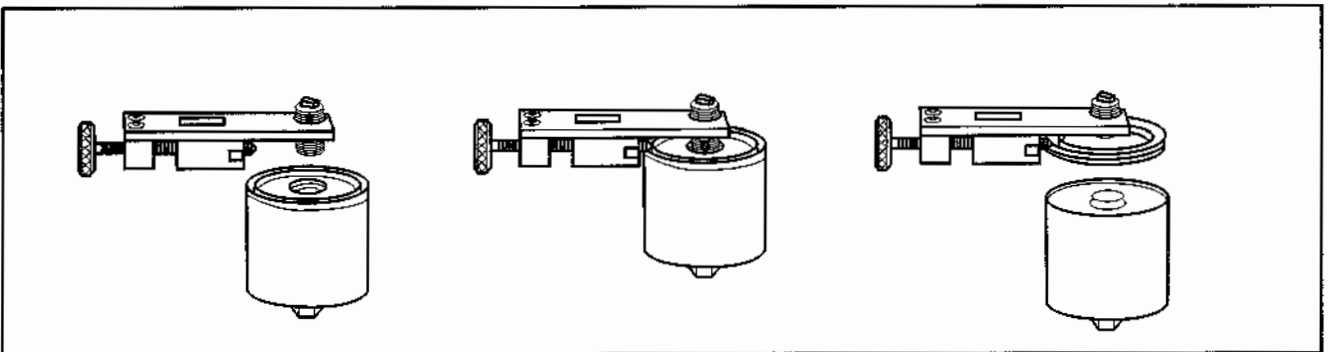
When replacing a disposable oil filter, the standard practice is to cut open the old filter with a special filter cutter and inspect the element for metal particles.
